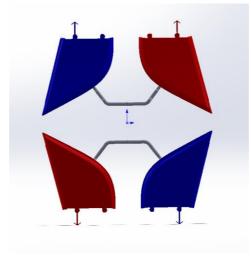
Parts configurations in the mold. Red - Left part; Blue - Right part.
